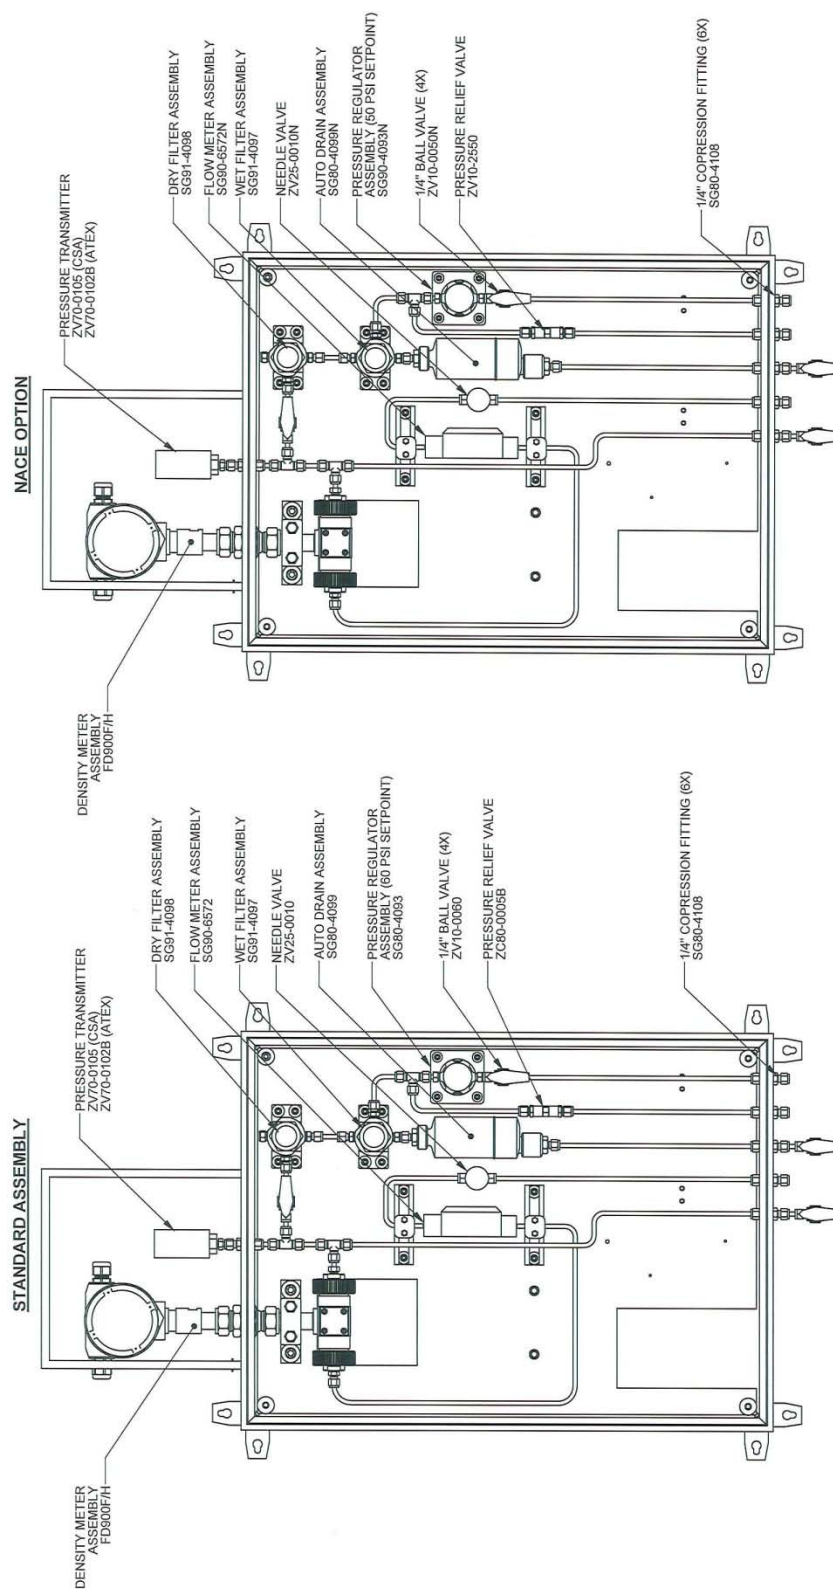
SG91-6002: General assembly drawing, basic gas system (sheet 3 of 3)
